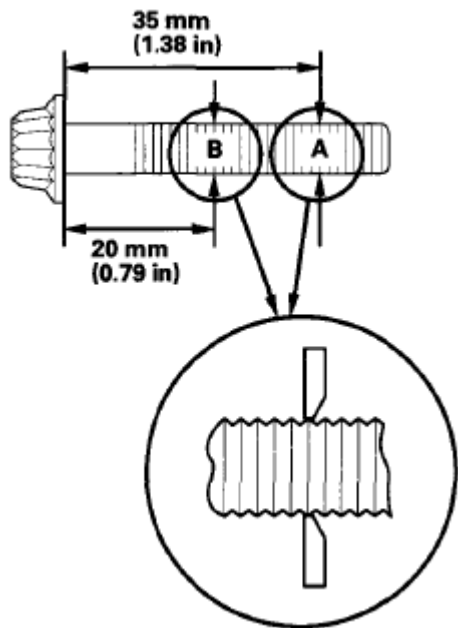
Measuring Diameter Of Each Connecting Rod Bolt
